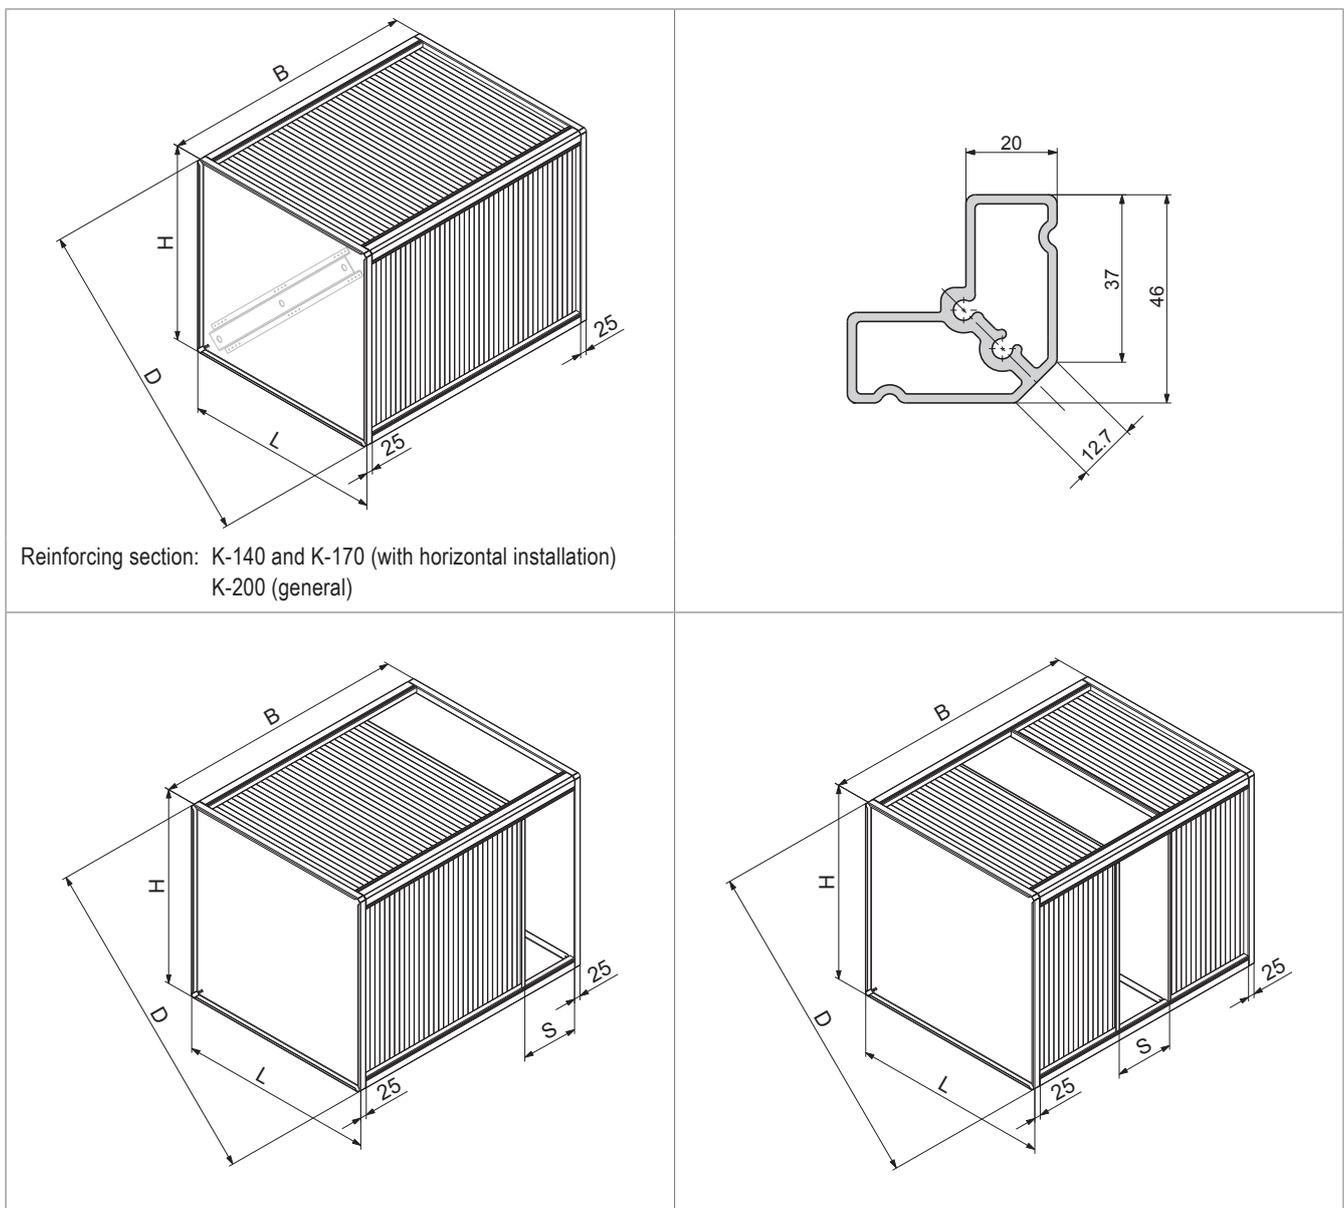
Dimension sheet for Krivan plate heat exchanger without dampers (dimensions in mm)
